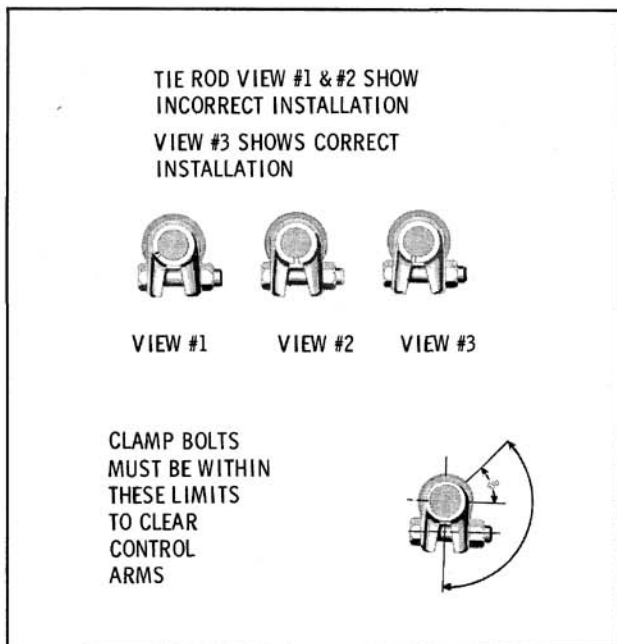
Tie Rod Clamp Positioning (52 through 86 Series)
